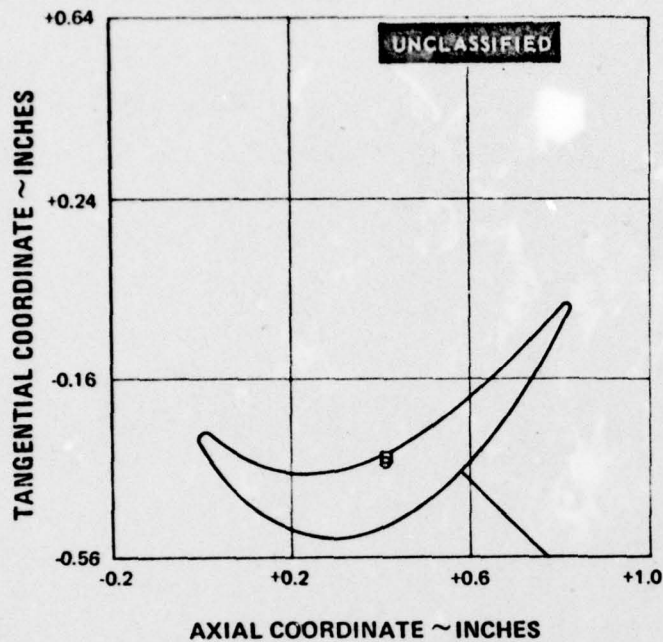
Elevation and Section Location of Second Vane, Recambering Design C
